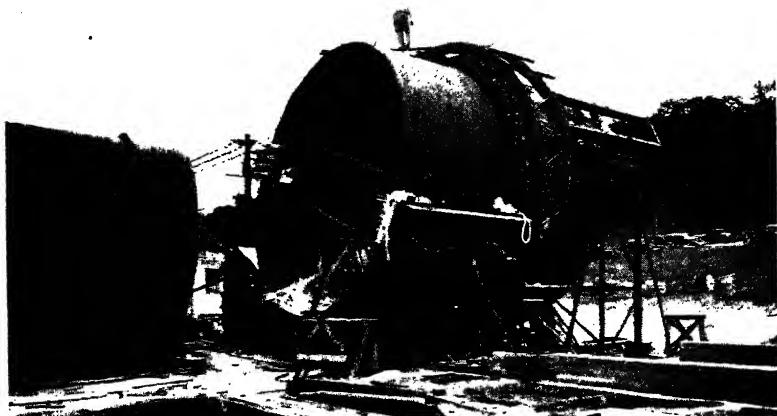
Heating units in place on a 20-foot pipe section.
